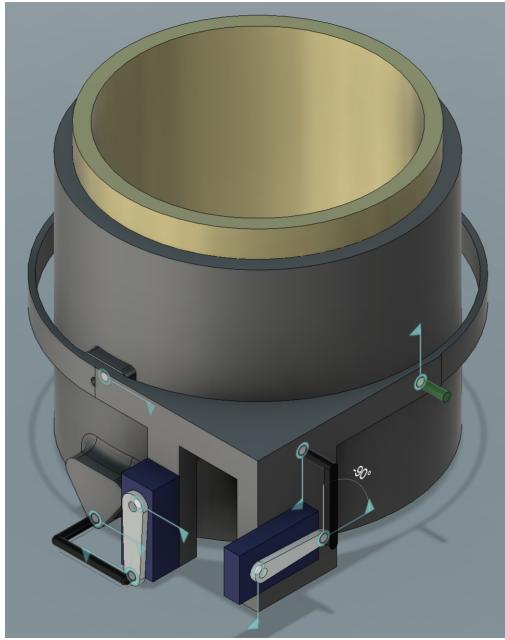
Isometric view of the thrust vectoring mechanism (Version 2)
